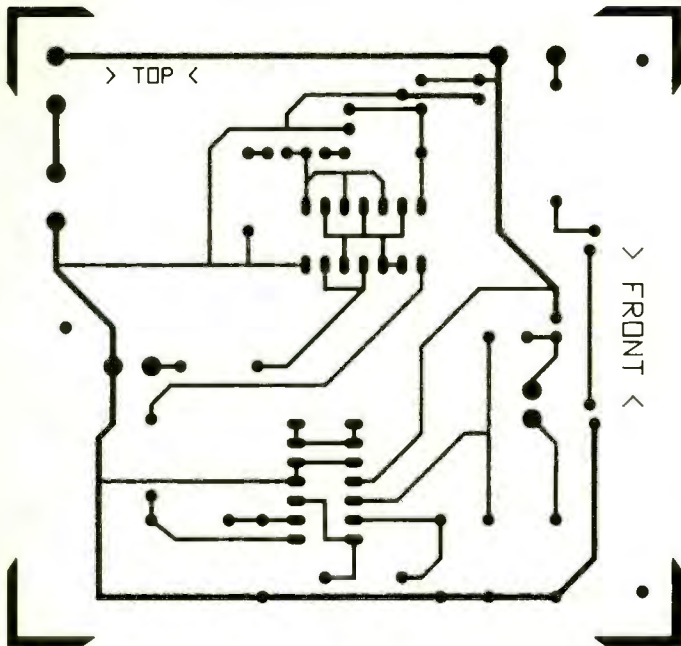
Actual-size etching-and-drilling guide for fabricating printed-circuit board.
